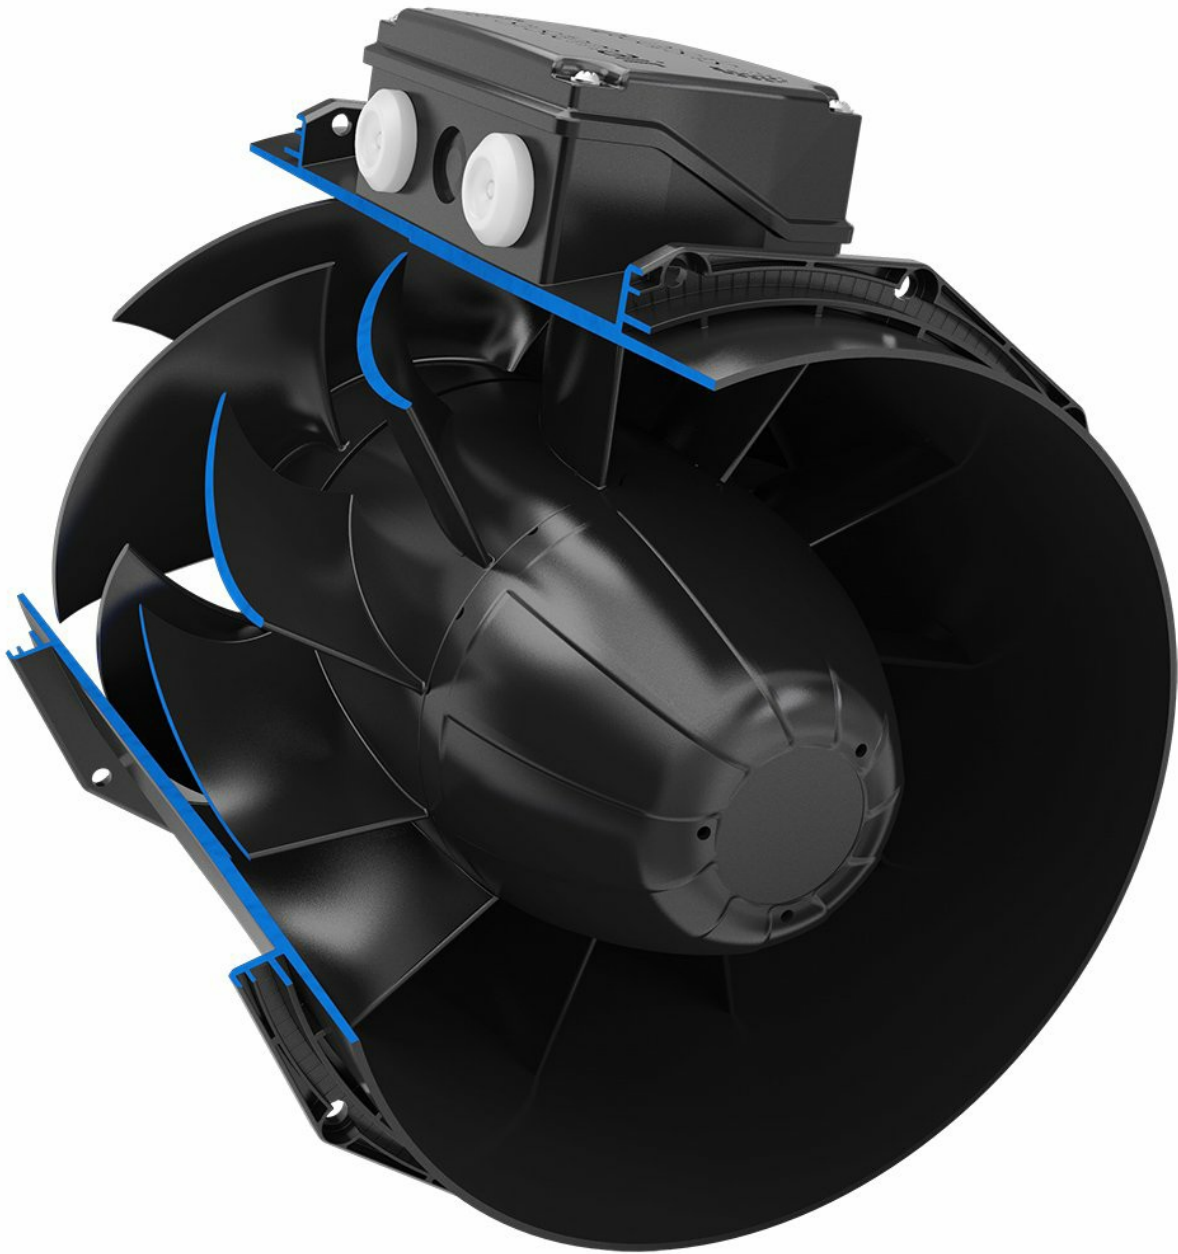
Detailed view of the fan's internal components, including the impeller and motor housing.
